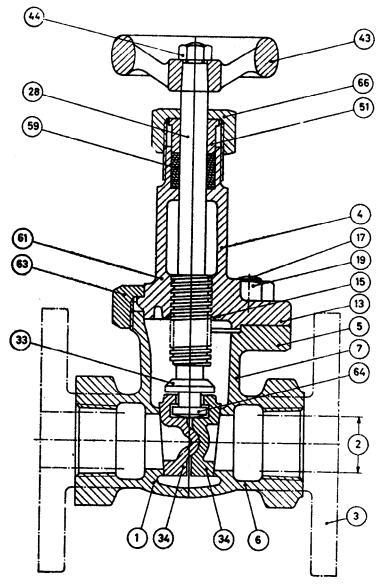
Inside Screw, Split Wedge, Rising Stem
